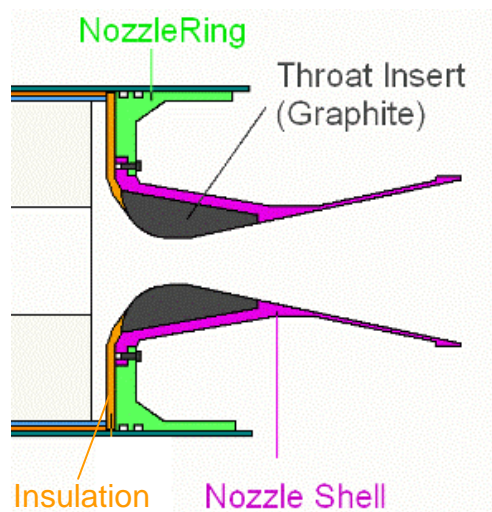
Three-piece nozzle design concept for the *ProtoSShot-M Mark I* rocket motor
